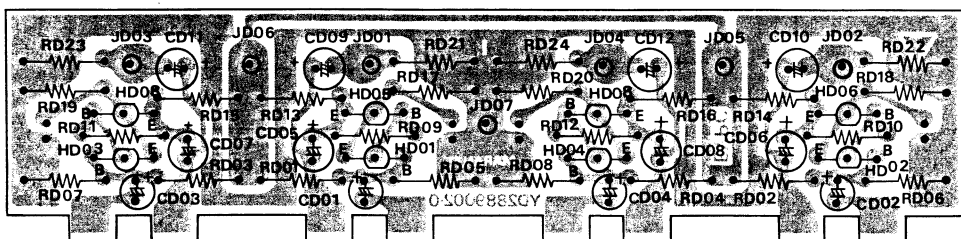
Tone Amplifier Assembly PD01 Component Locations
